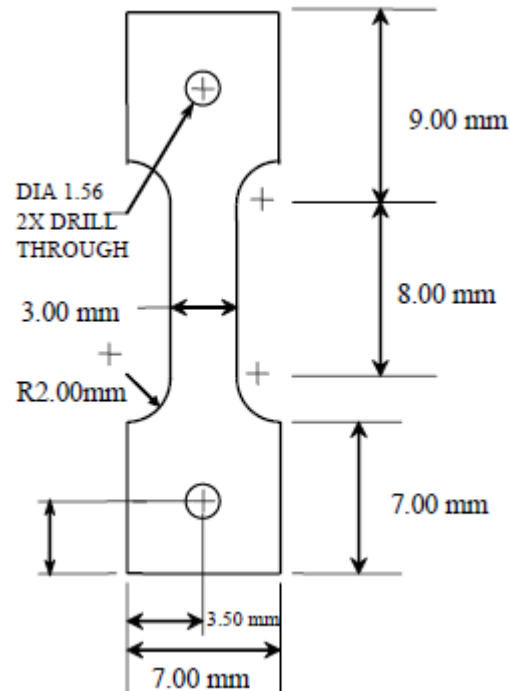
A schematic illustration of the tension sample dimensions [41].
